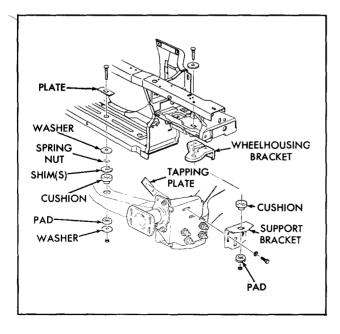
Radiator Cradle Mounts—Except Eldorado
